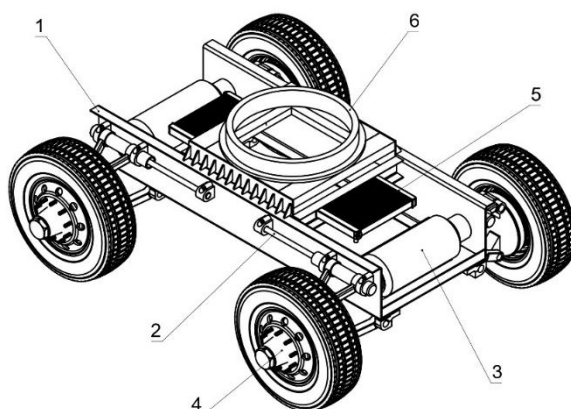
External 3D view of the turntable: 1 – frame; 2 – torsion bar; 3 – step electromechanical transmission module; 4 – wheel with wheel reducer; 5 – radiator; 6 – turntable shoulder strap
